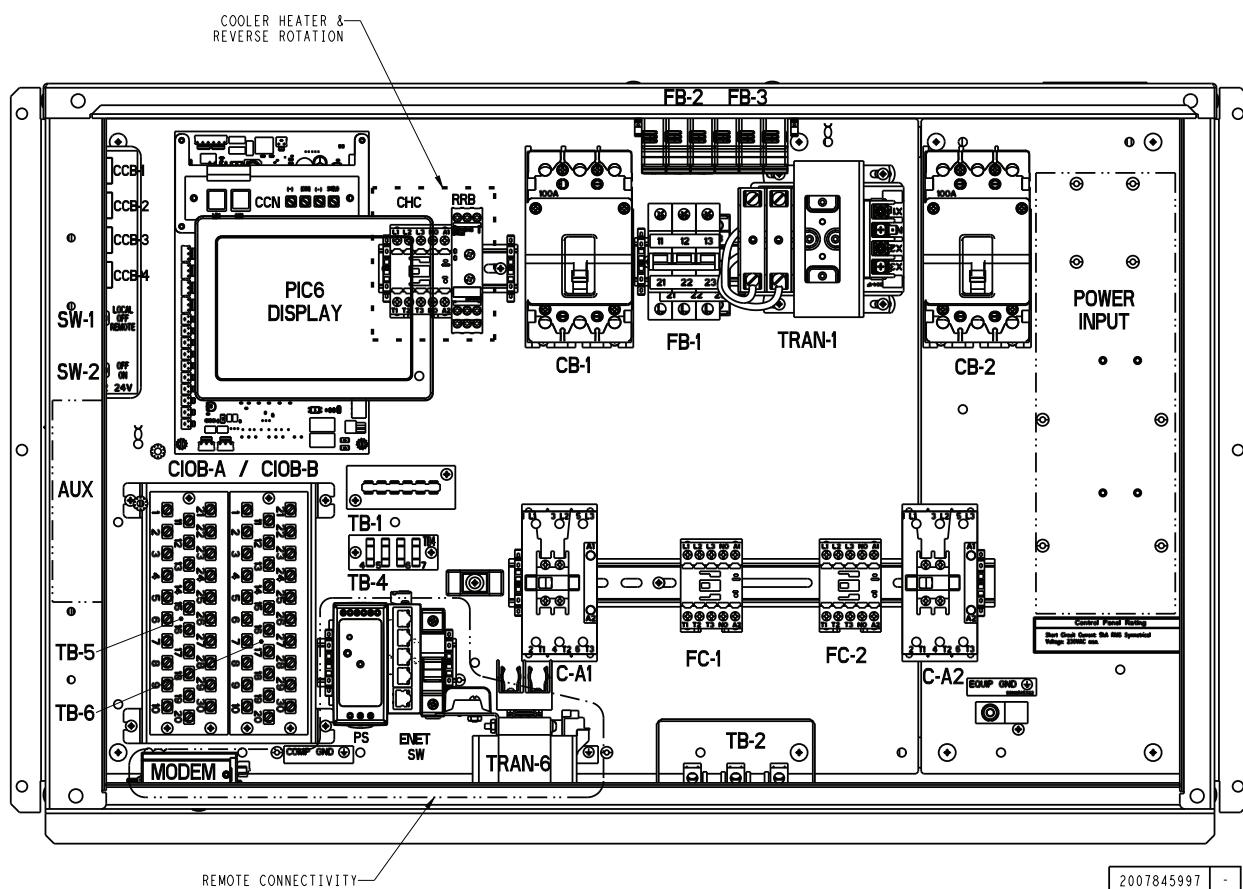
Component Layout Drawing (38RC025-030 – Small Main)
